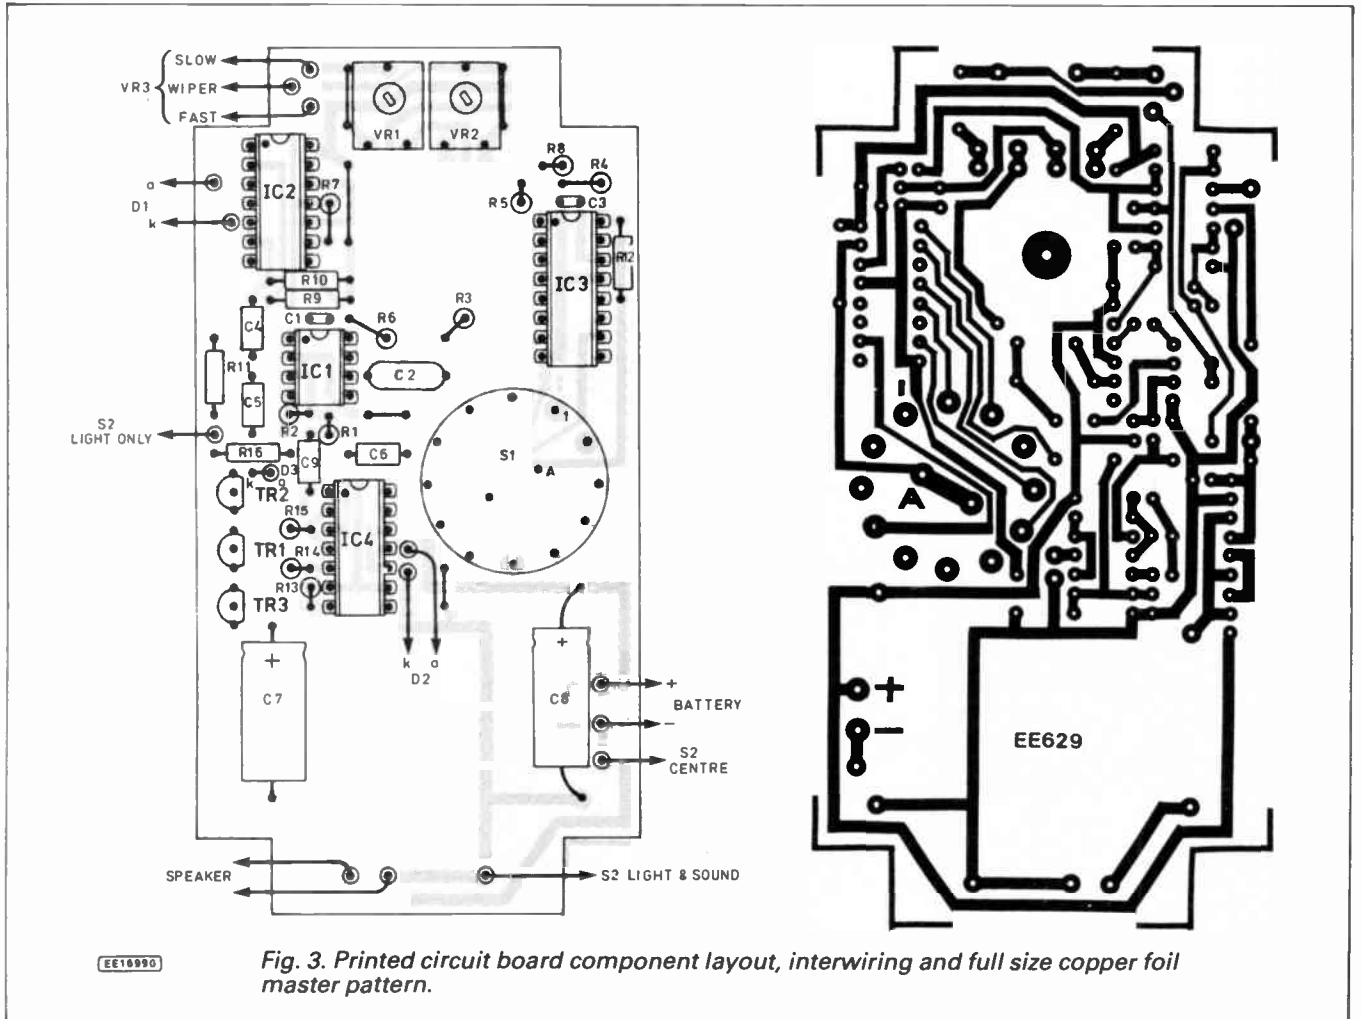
Printed circuit board component layout, interwiring and full size copper foil master pattern.
